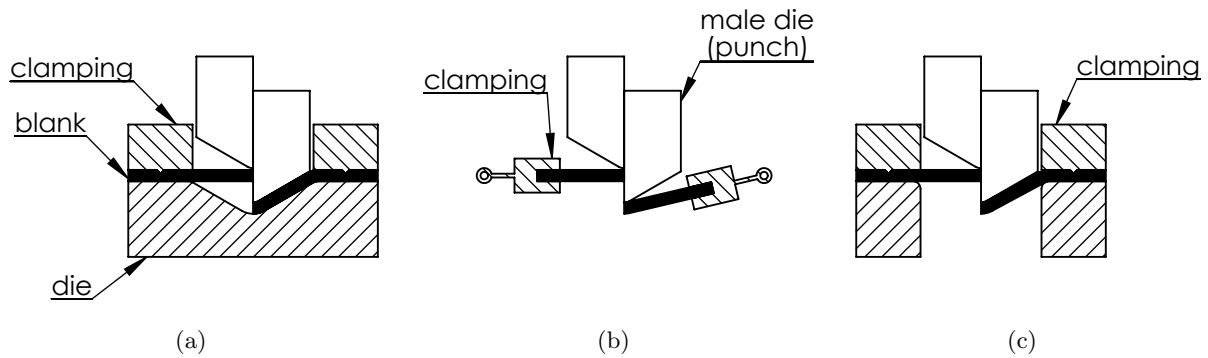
Basic stretch forming process: (a) using lock bead blankholder and both female and male dies, (b) using clamps and male die only, (c) using lock bead blankholder and male dies only
